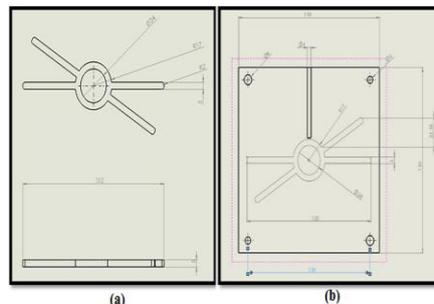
Orthographic Projection of (a) Lock and (b) Mould Die
